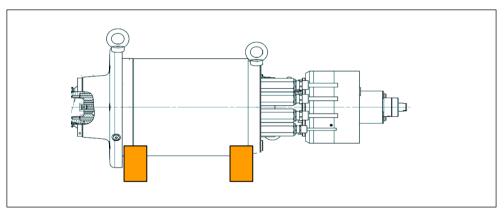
Locating the spindle on the wooden V-shaped blocks in a horizontal position
